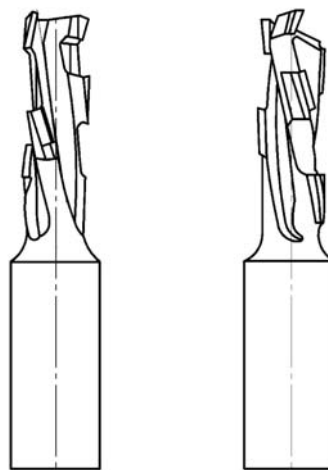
Shank cutter with continuous spaces between cutters (milling tool 1)
